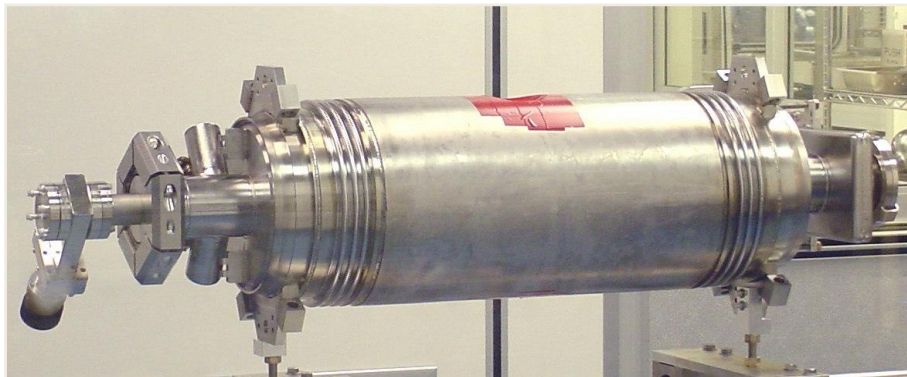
He vessel fabrication used to contain the cavity and the surrounding liquid.
